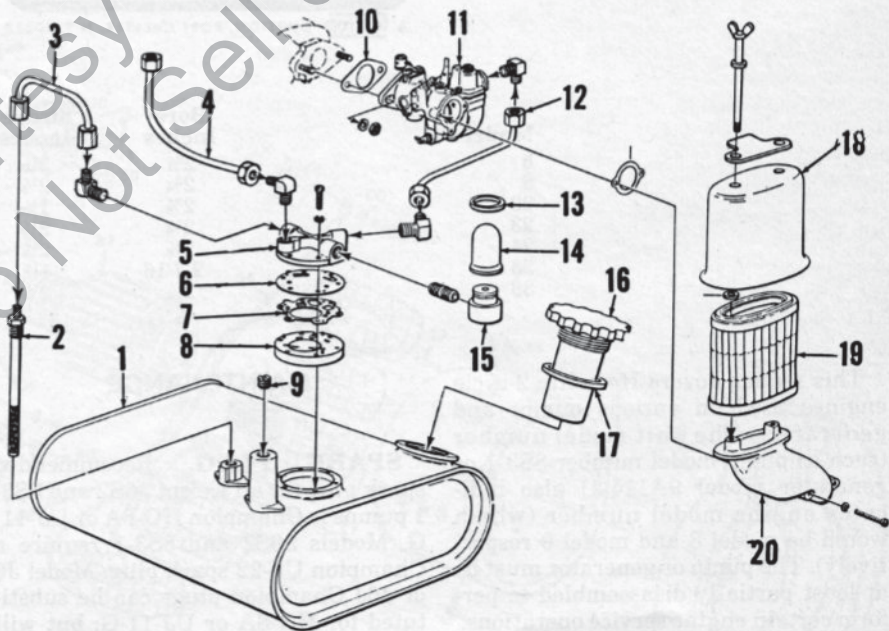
Exploded view of fuel system on models using Tillotson float type carburetor. Exploded view of carburetor is shown in Fig. HL41. Actuating primer bulb (14) will pump fuel into carburetor float bowl.
